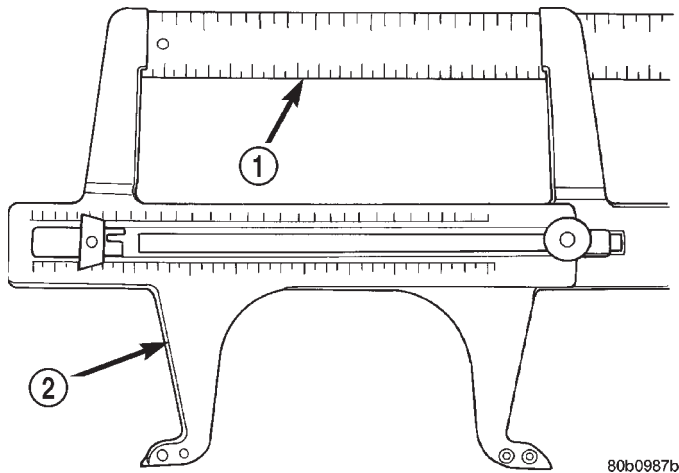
Setting Gauge To Park Brake Shoe Measurement
